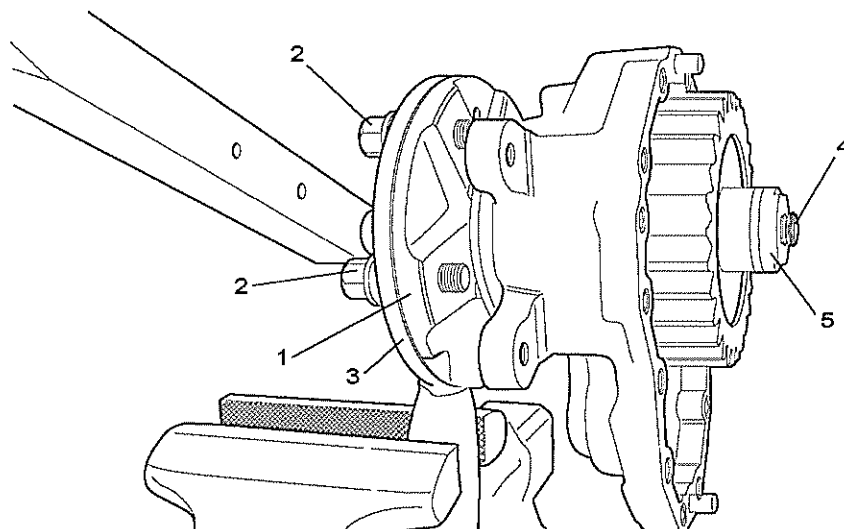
Brake anchor plate showing anti-fatigue bolt threads
